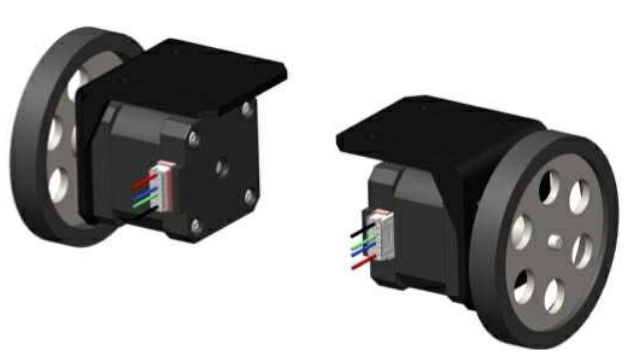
The drive train with the 2 wheels connected to 2 stepper motors with their brackets [22].
